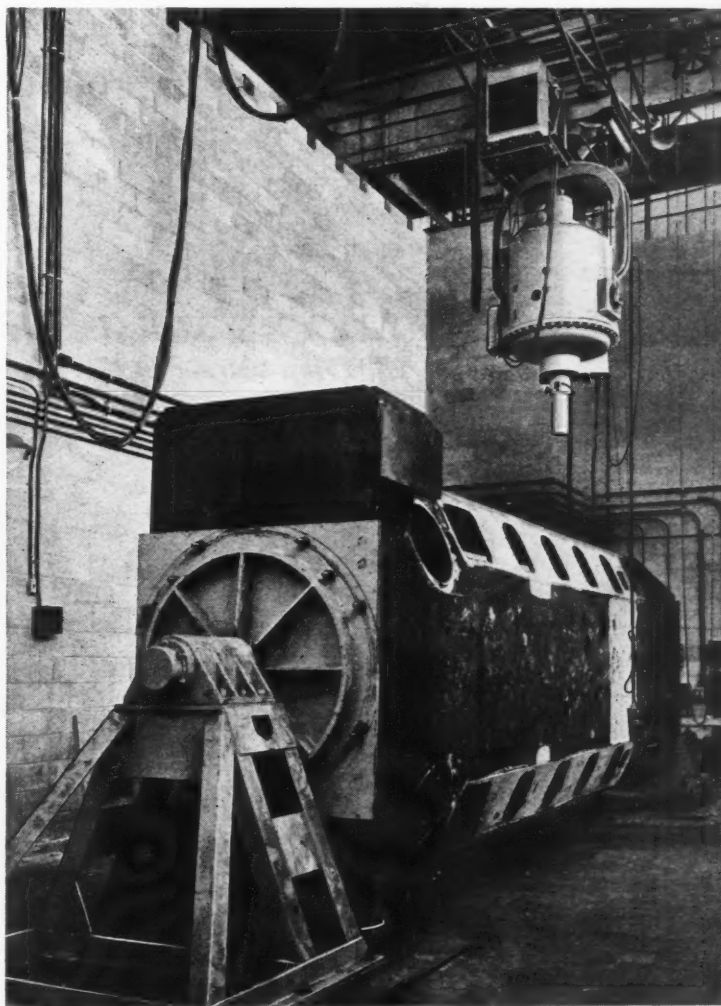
X-ray photographs are taken in a specially built room with the set-up here illustrated. The X-ray machine hangs from a movable supporting carriage above the hull
